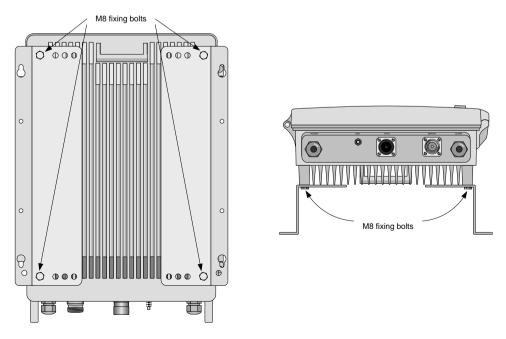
Mounting Plates Fixed to Repeater – Single/Dual Clamshell
